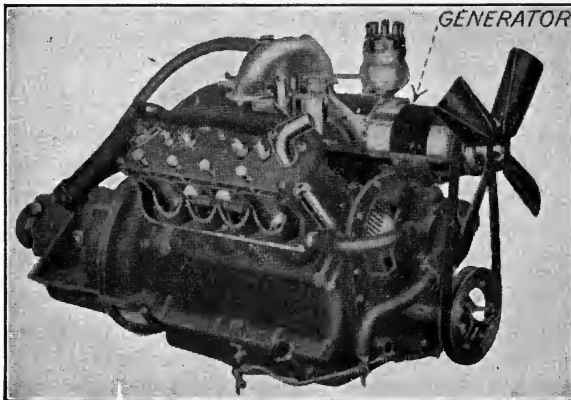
Delco ignition installation on Oldsmobile eight-cylinder engine, model 45A.
